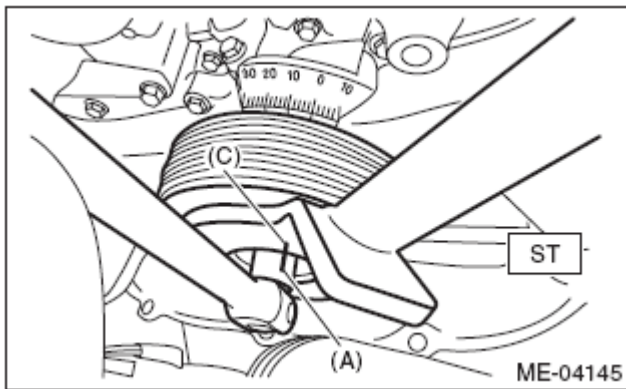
Tightening Crank Pulley Bolt Using Crank Pulley Wrench
